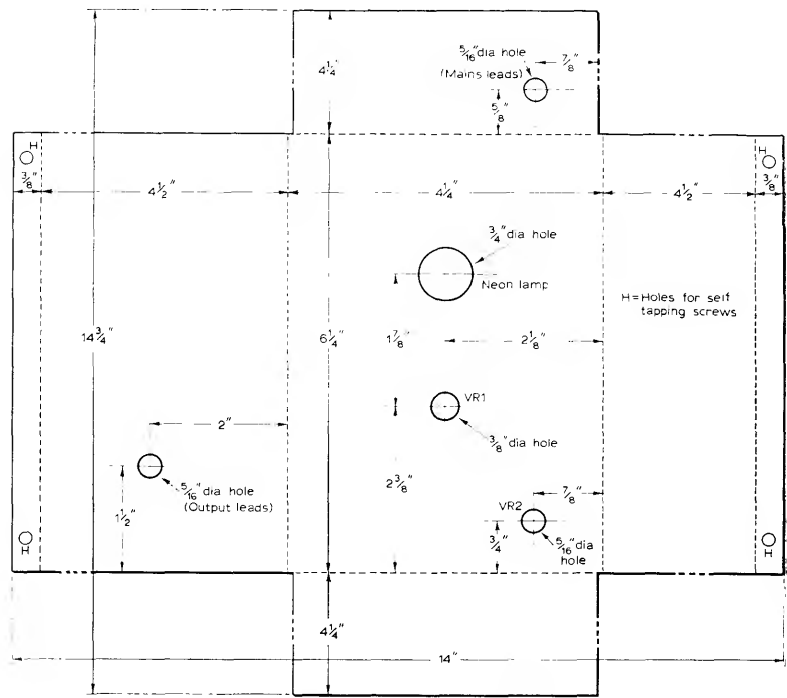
Dimensions and drilling details of an aluminium case to cover the power pack.
